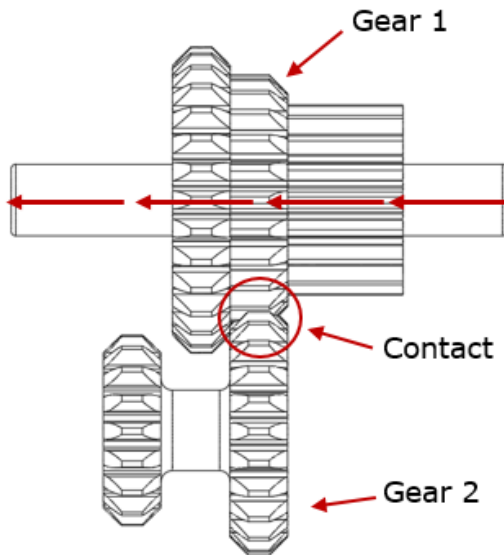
B Side View of Internal Gearing demonstrating contact between *Gear 1* and *Gear 2* as first position.
